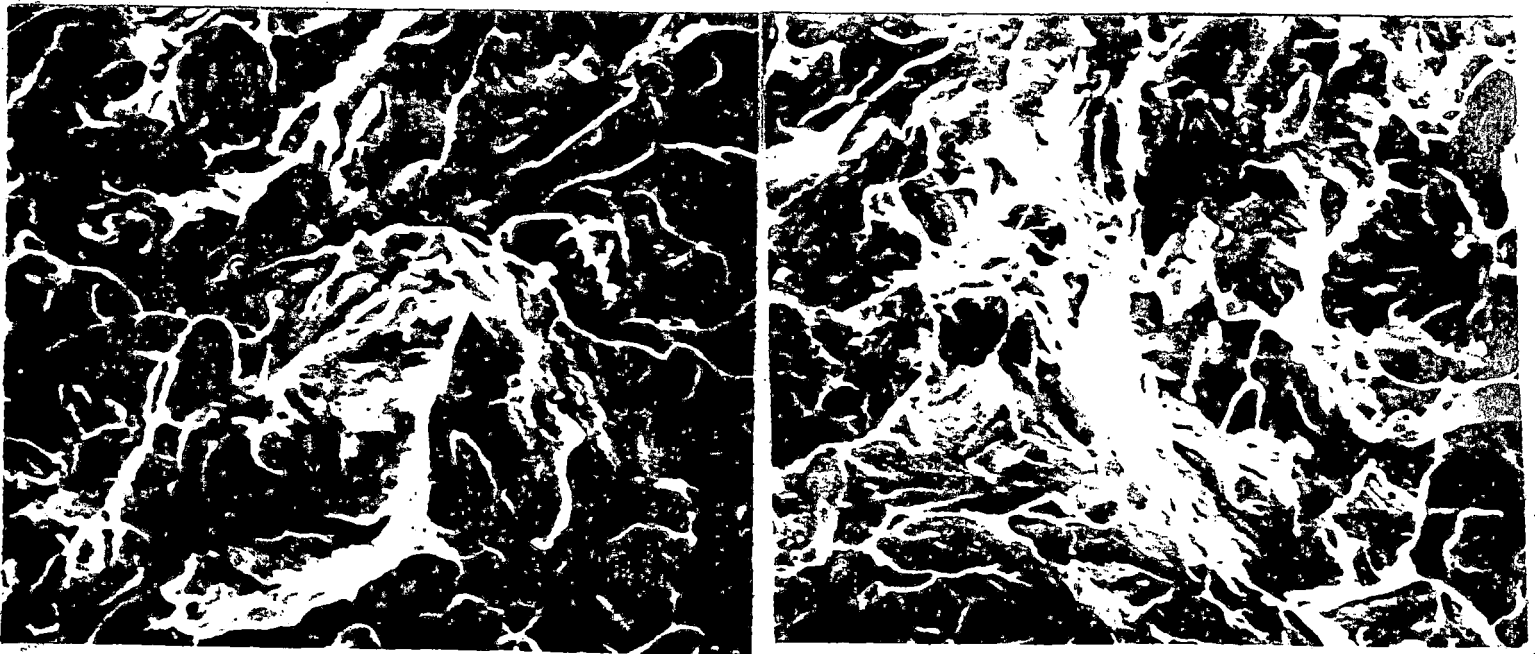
Fracture Surface of Class C Crack Arrest Specimen, Before (left) and After Crack Arrested; Mag. 500X.
